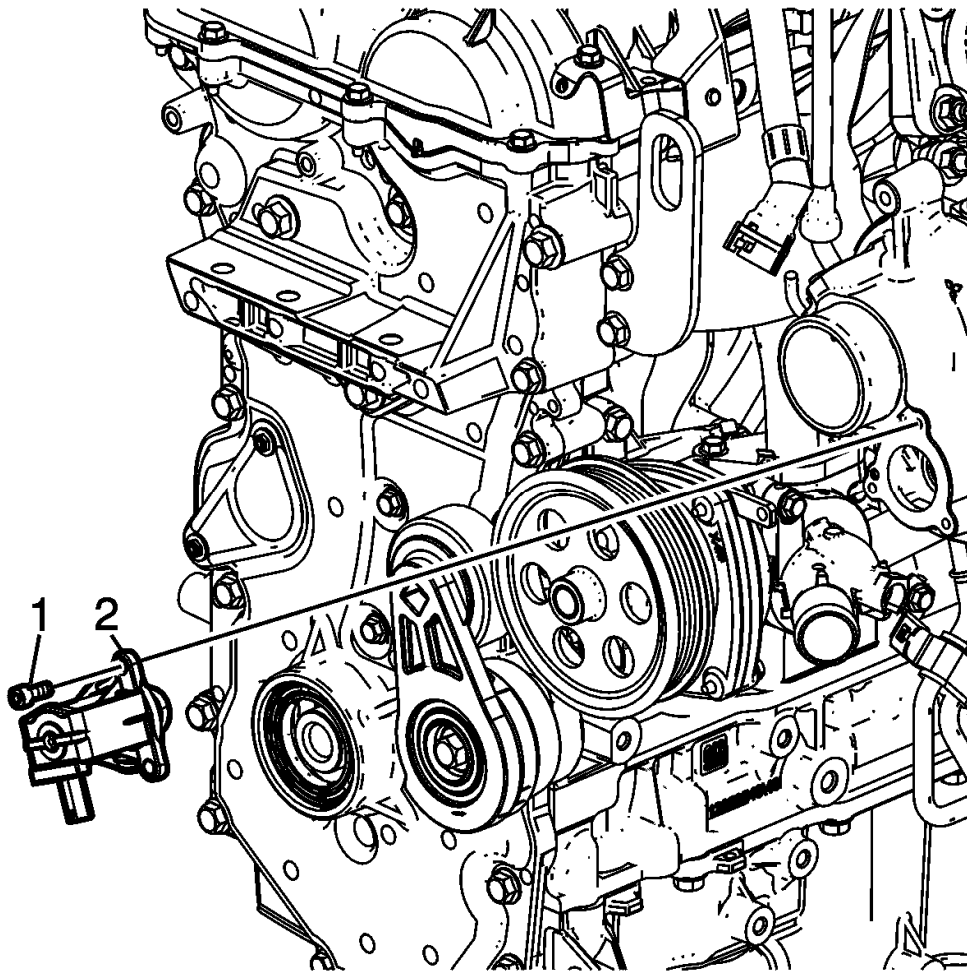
Turbocharger Bypass Valve Solenoid Bolts
